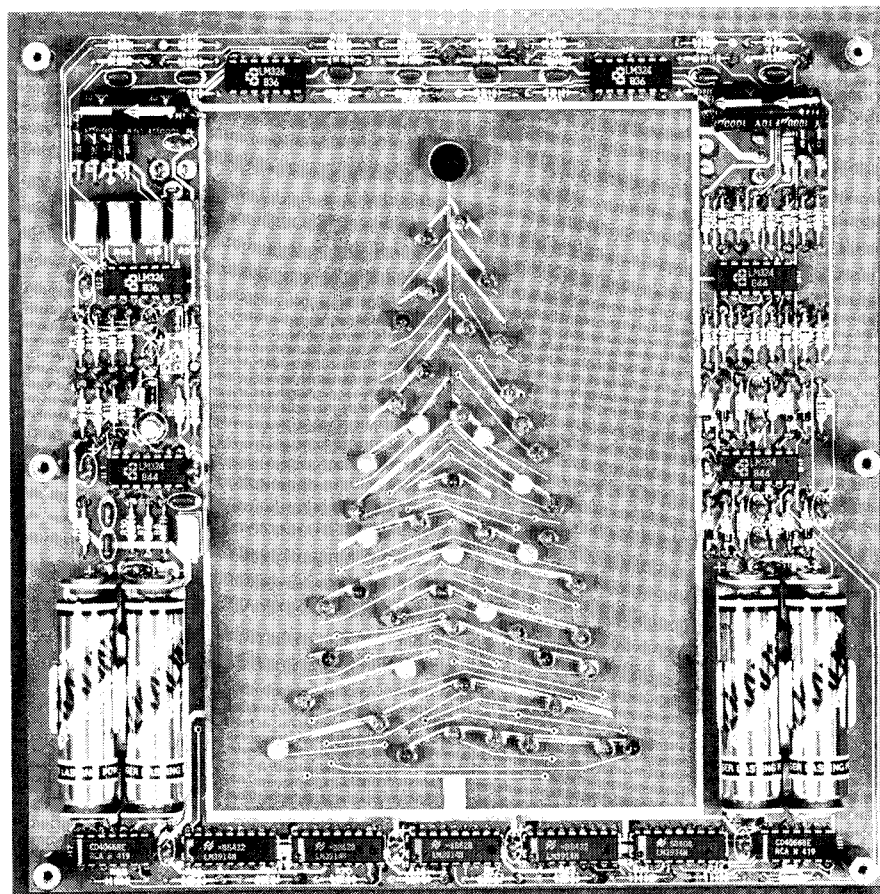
THE SPACERS THAT HOLD THE BOARD in place in the metal frame should be installed early to prevent damage to soldered components.
